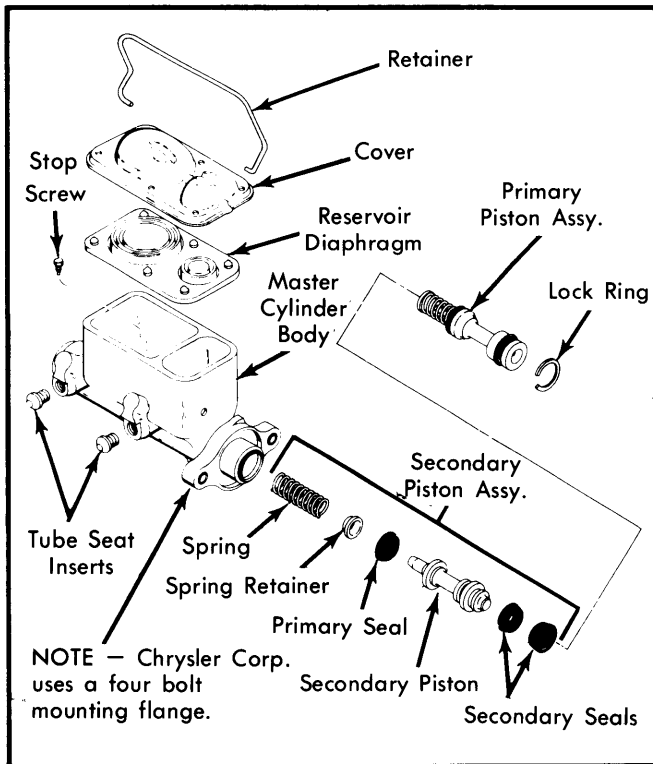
Typical Delco-Moraine Master Cylinder (General Motors Shown Others Similar)
